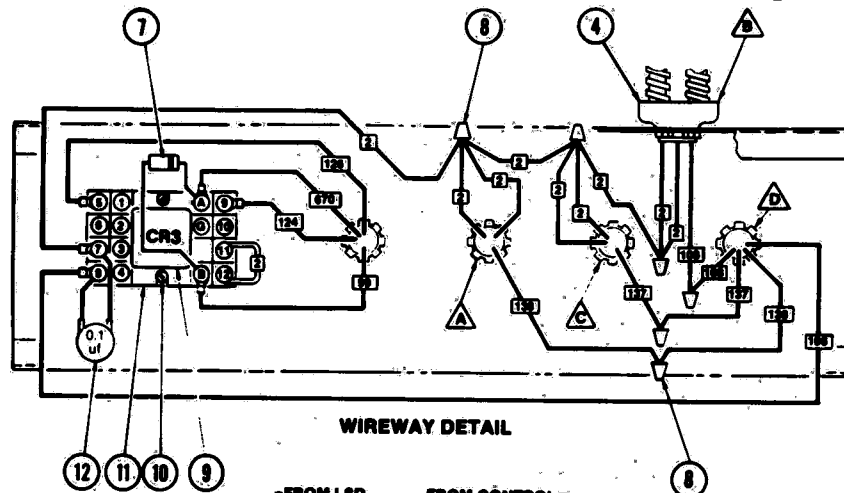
SECONDARY CABLE ASSEMBLY AND DETAILS.
